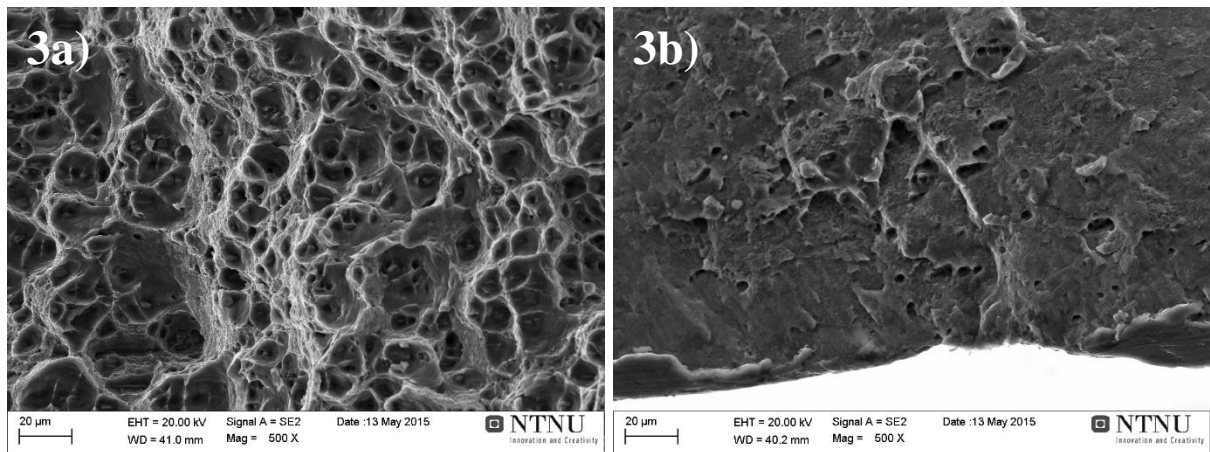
The final fracture with 500X magnifications 3a) dimples in the middle of the fractured surface and 3b) micro shear at the edge of the fractured surface.
